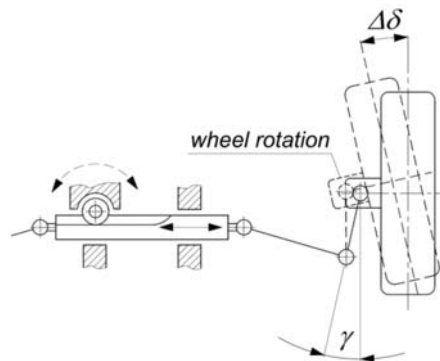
Change of the steering angle caused by clearance on the rocker arm pin: $\Delta\delta$ —changing the steering angle of the wheel, γ —steering arm inclination angle.
